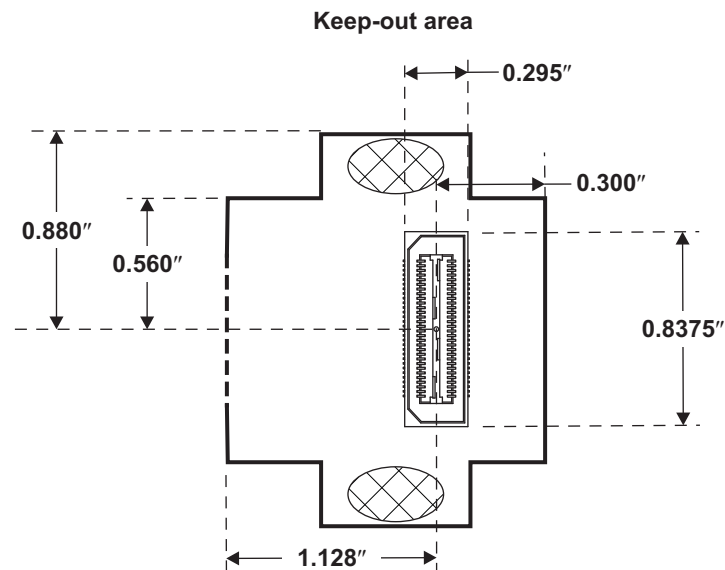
XDS560 v2 System Trace MIPI 60-Pin Target Cable Board Keep-Out Area
